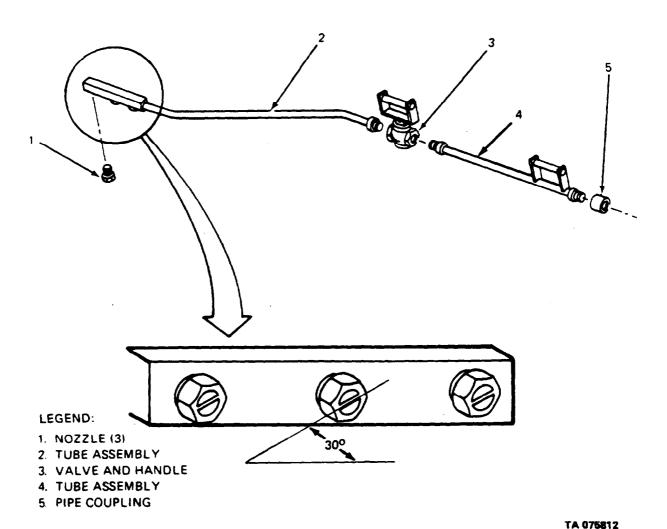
Disassemble/Assemble Hand Spray Gun.
